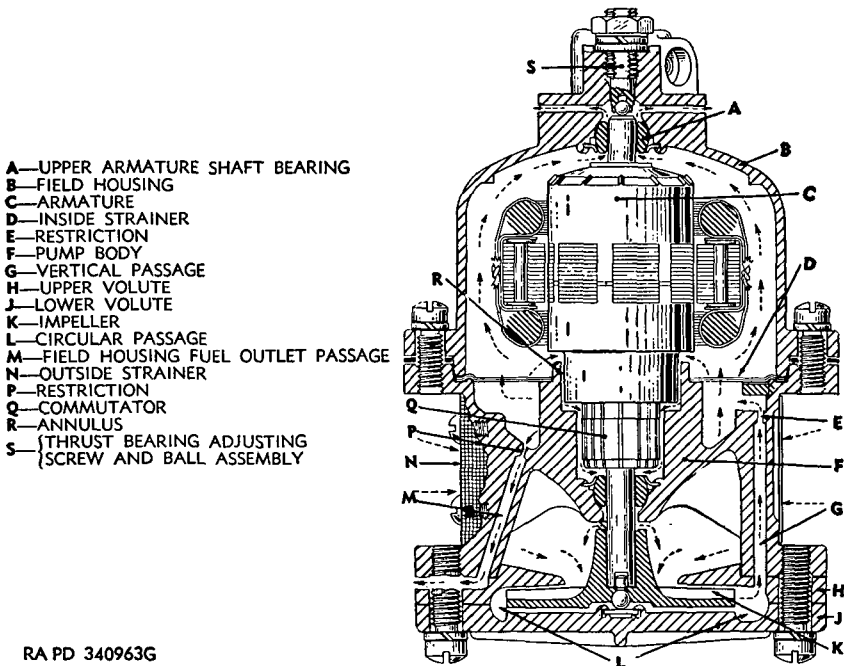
Cooling and lubricating circuit—sectional view through vertical passage.
